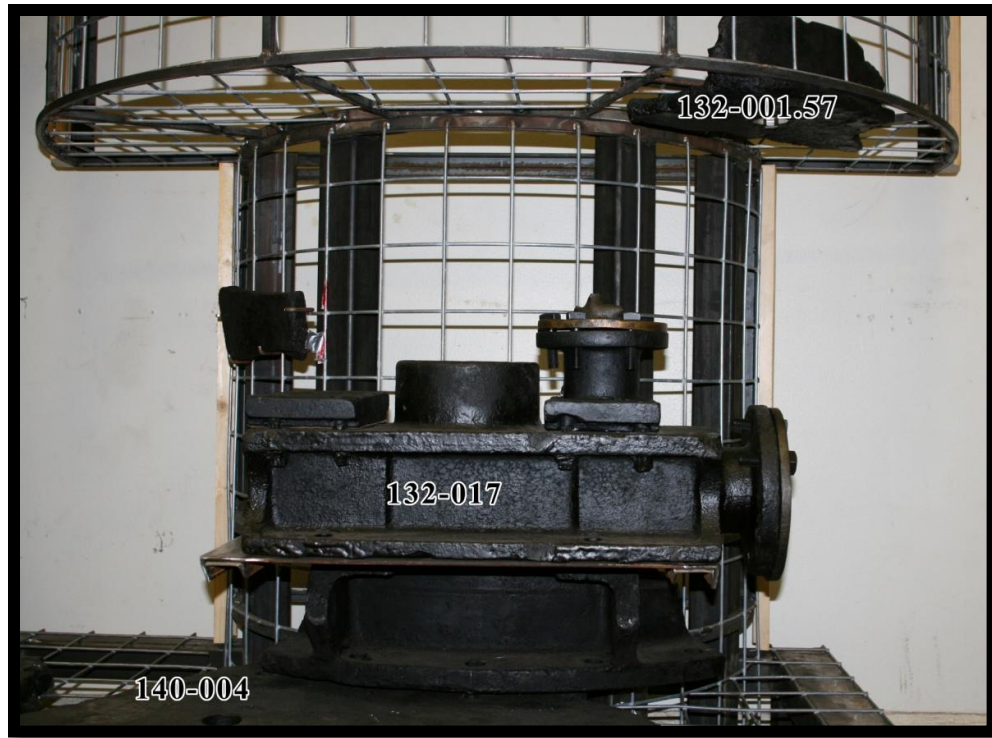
Reconstructed valve assembly on the shelf and lower base plate fragment (Artifacts 132-017 and 140-004); the support flange fragment for the upper hotwell is in upper right corner (Artifact 132-001.57).
